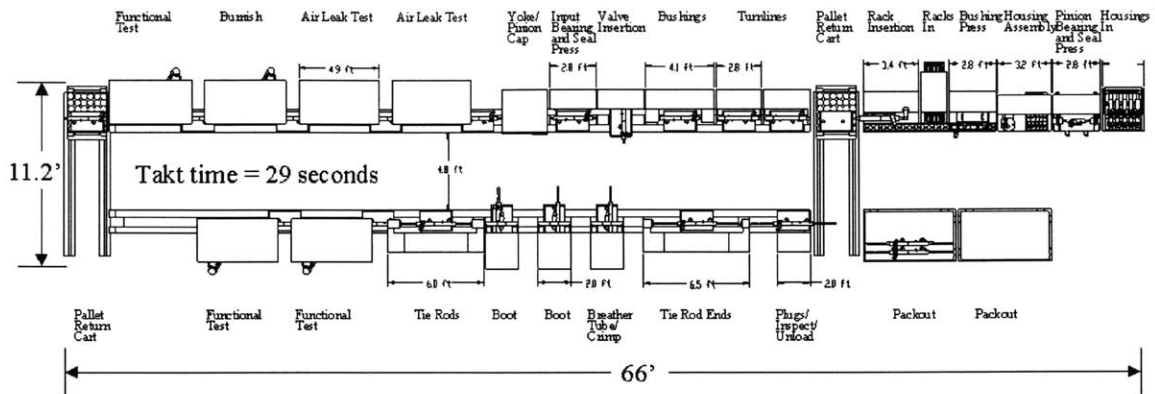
New Indianapolis U222 Assembly Cell Layout for Manufacturing Steering Gears
